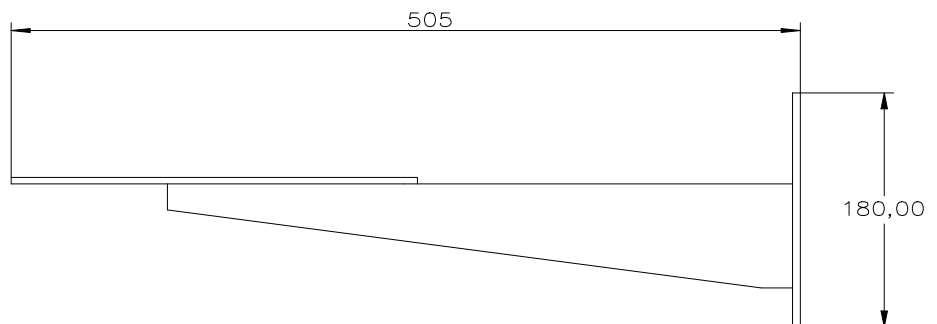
Side view of Wall-mounted Bracket
